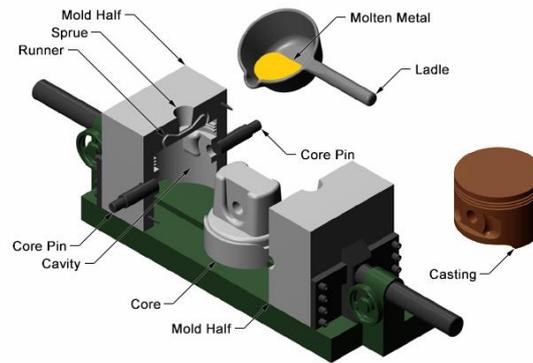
The permanent mold casting process for automotive aluminum alloy piston [66]
